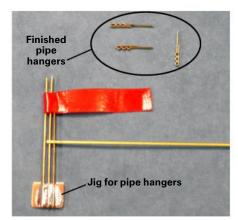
Pipe hangers. Peter made a jig to form the pipe hangers for the sides of the tender. He used a piece of .250" steel rod in a drill press to stamp the .010" x .030" flat brass over the jig.
